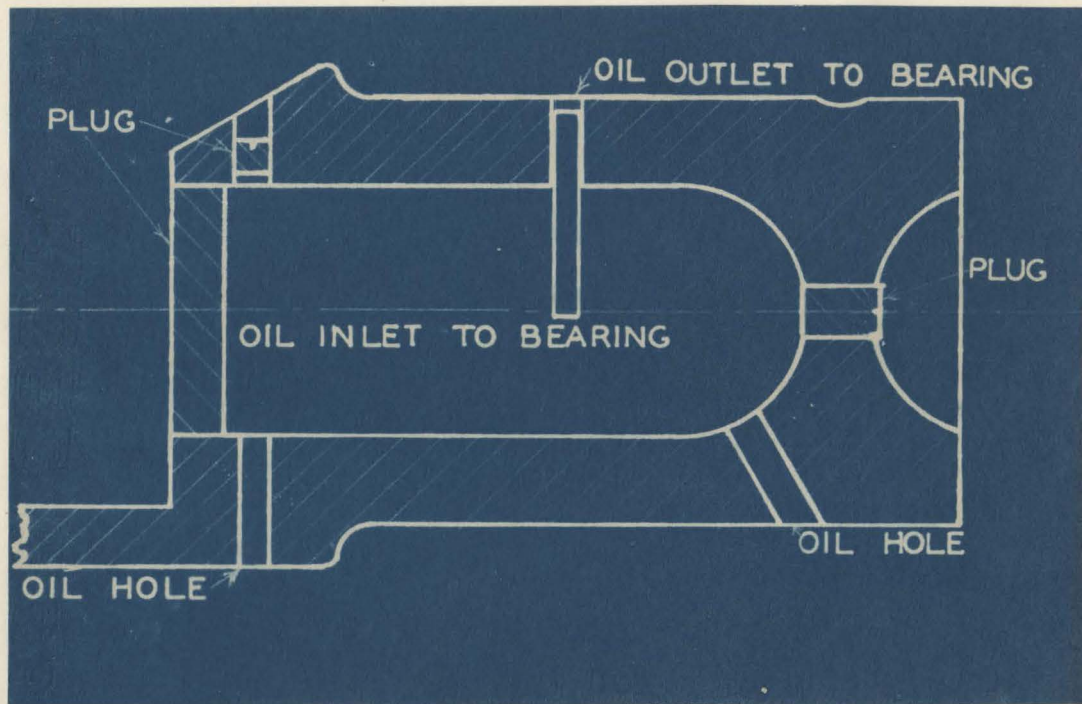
Cross Section of a Crankpin of a Radial Engine, Showing the Method of Centrifuging the Oil. (The same principle is employed on the in-line engines.)
